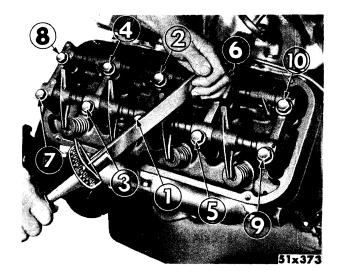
Tightening Cylinder Head Bolts (Sequence)
